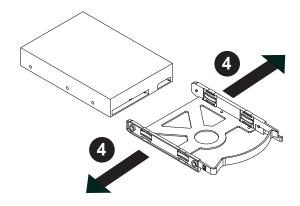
Removing the Hard Drive Carrier from the Hard Drive Cage
